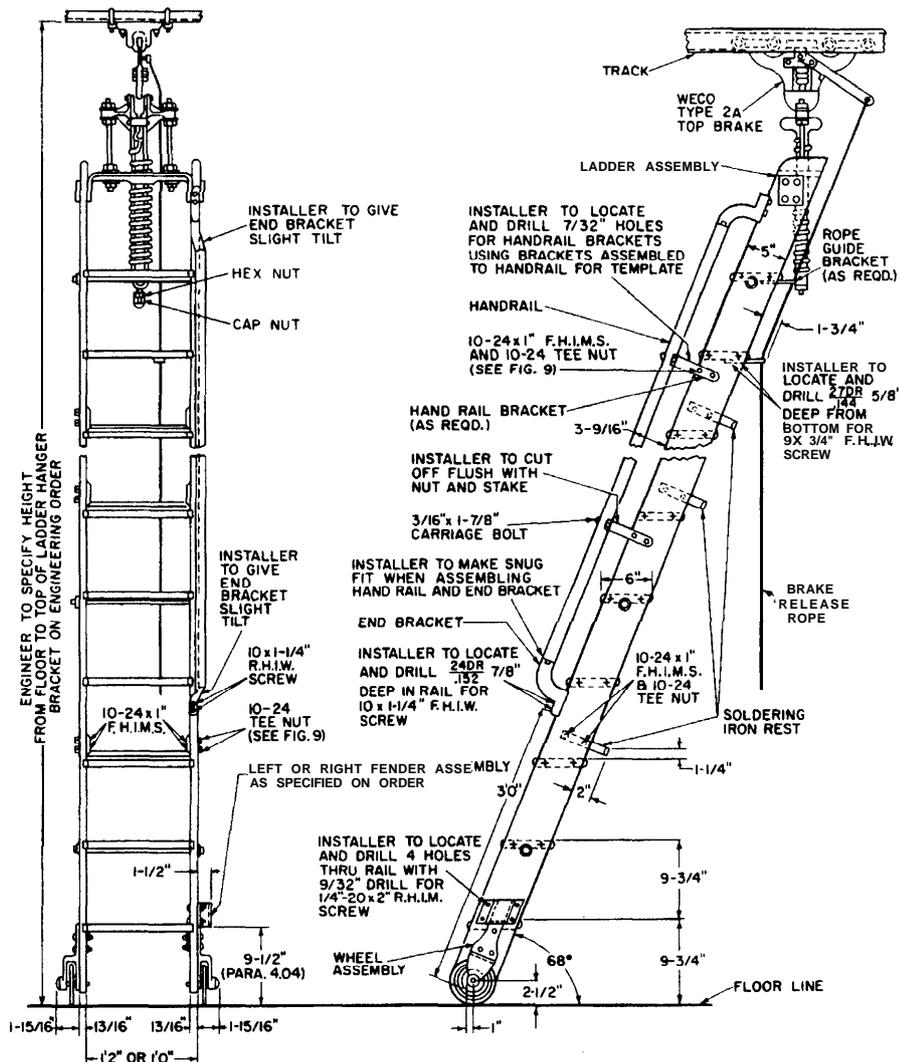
Ladder Assembly Showing Handrail on Right Side.
